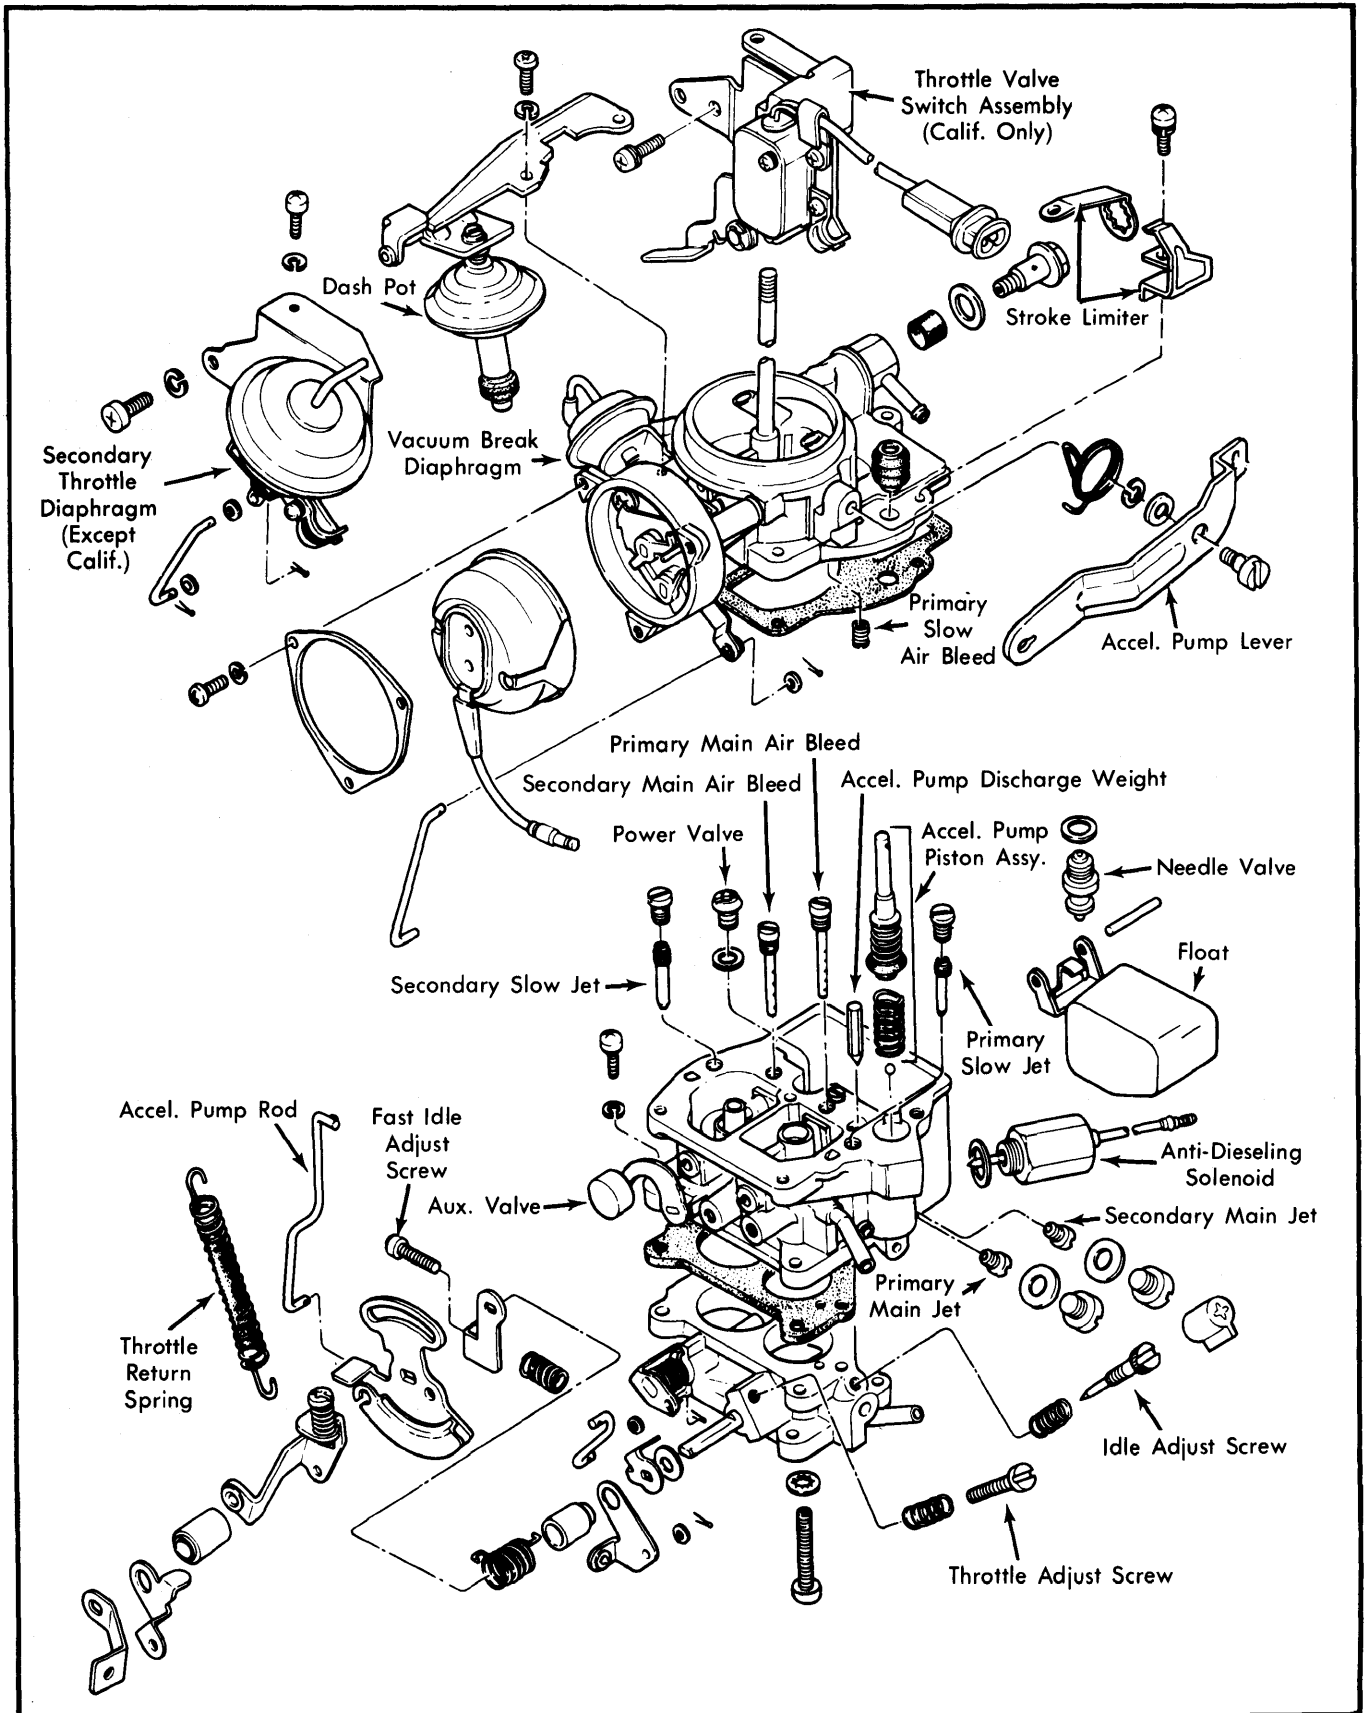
Exploded View of Datsun 210 and 310 Hitachi DCH 306 Carburetor
